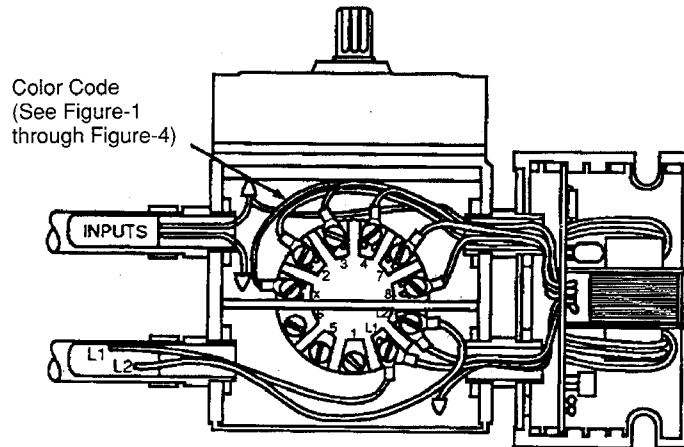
CP-8391-456 Wiring and Mechanical Arrangement (shown for MP-400, MP-2100 series and MP-9750 actuators).
